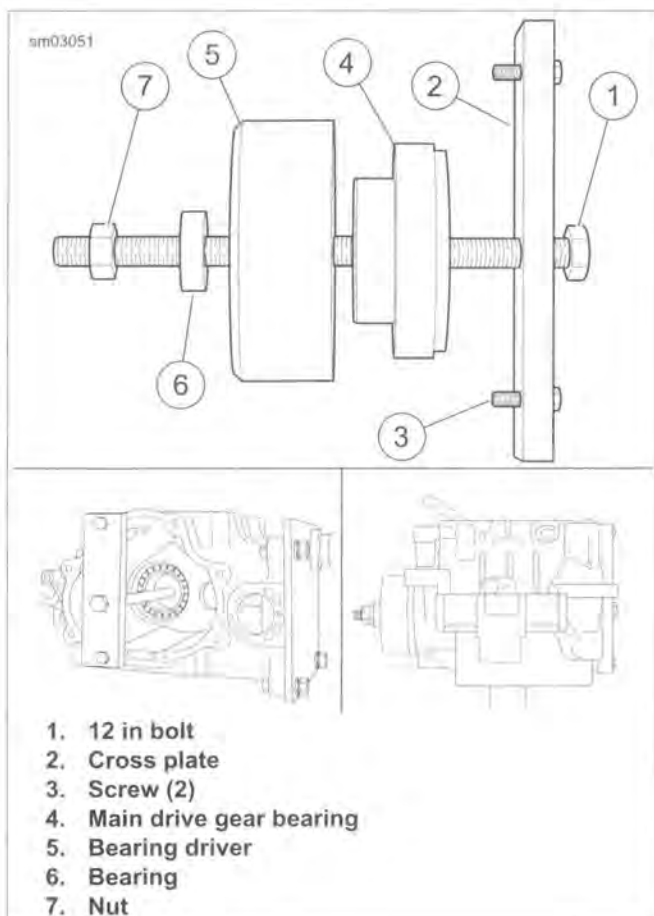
Installing Main Drive Gear Bearing (Typical)
